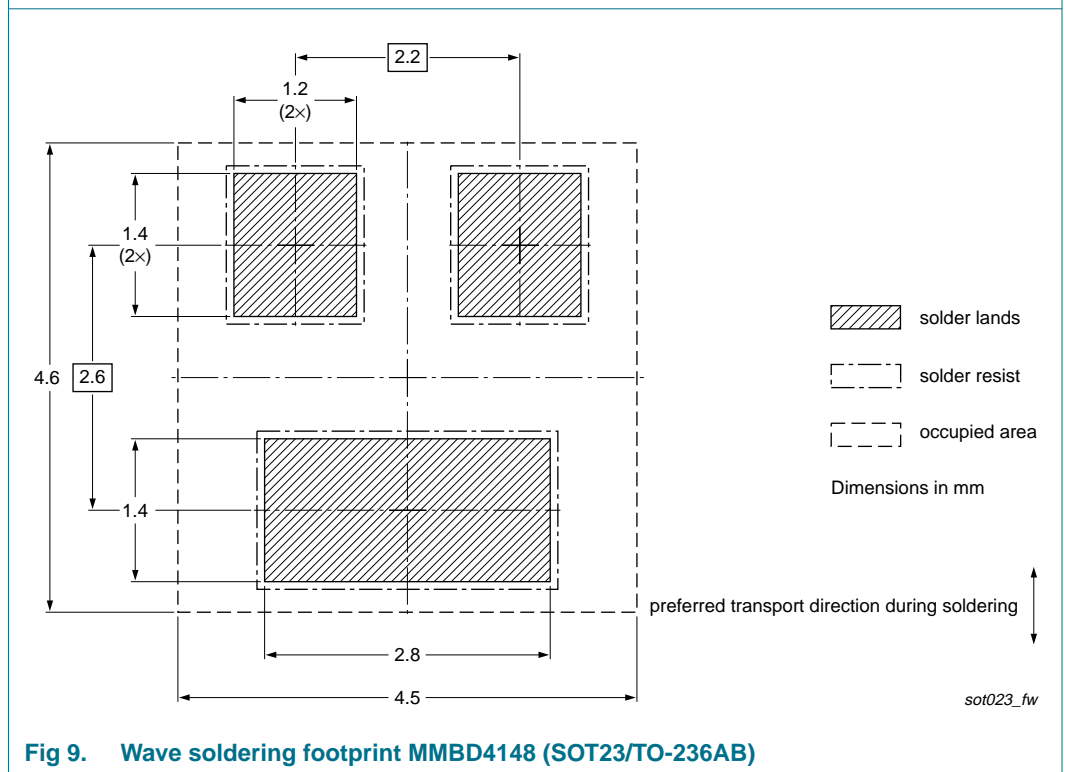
Wave soldering footprint MMBD4148 (SOT23/TO-236AB)
